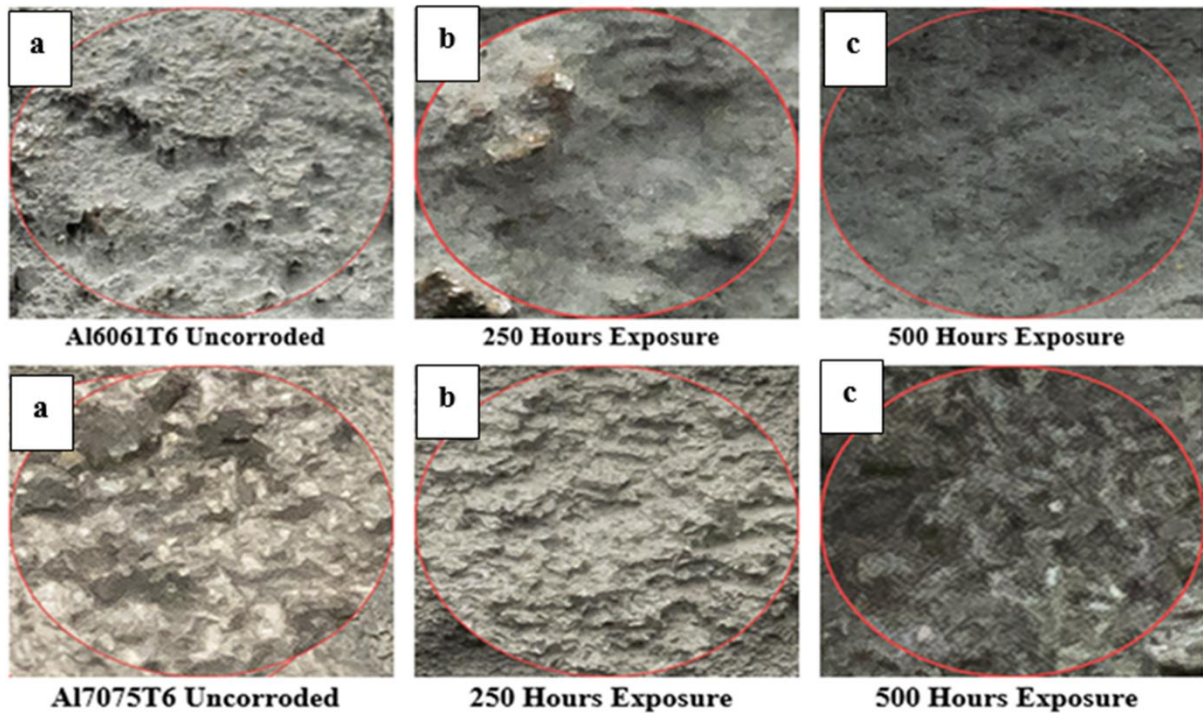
Optical surface images of fractured specimens representing with and without corrosion Al6061T6 and Al7075T6 (a) as-received samples (b) 250 hours; (c) 500 hours
